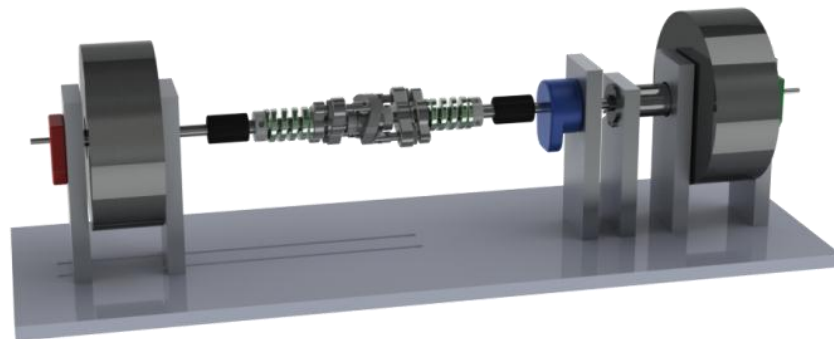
Testing Assembly with Cam Spring Prototype Installed
